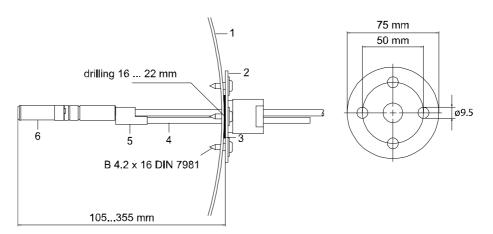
Installation of HMP363 Probe in Duct with Flange and Supporting Bar
